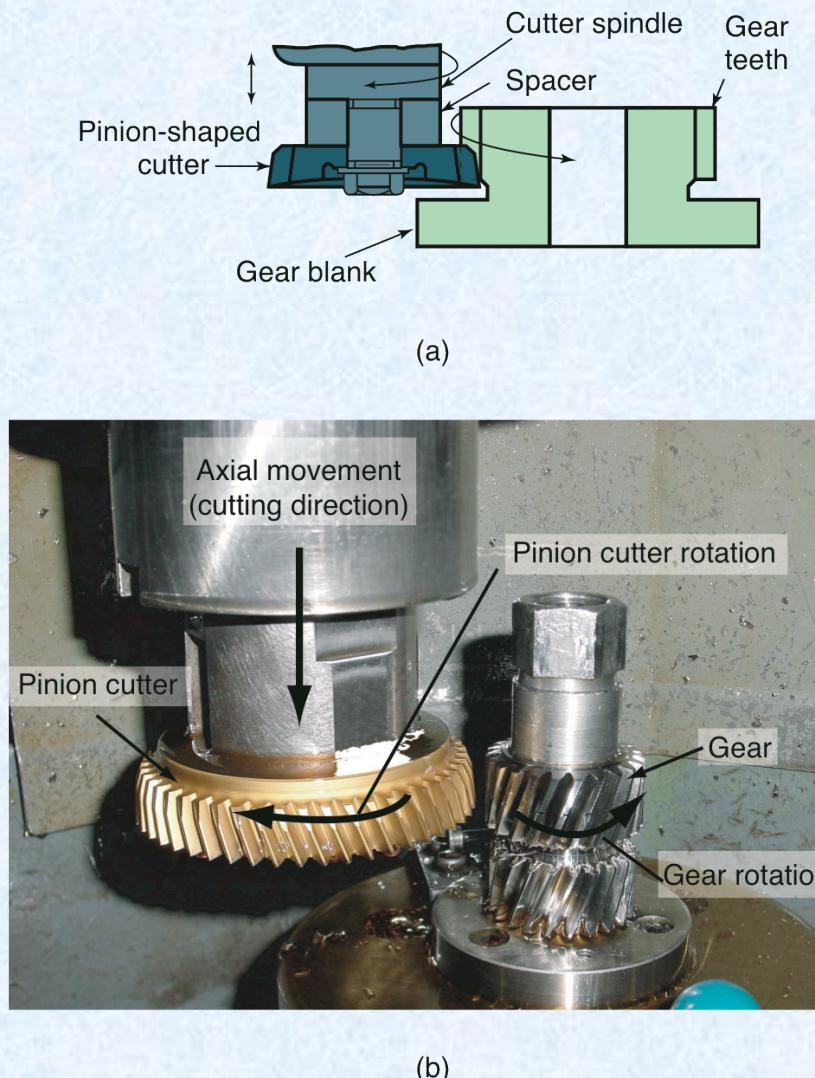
Production of gear teeth with a pinion-shaped cutter. (a) Schematic illustration of the process. *Source:* From Kalpakjian and Schmid [2010]; (b) photograph of the process with gear and cutter motions indicated. *Source:* Courtesy Schafer Gear Works, Inc.
